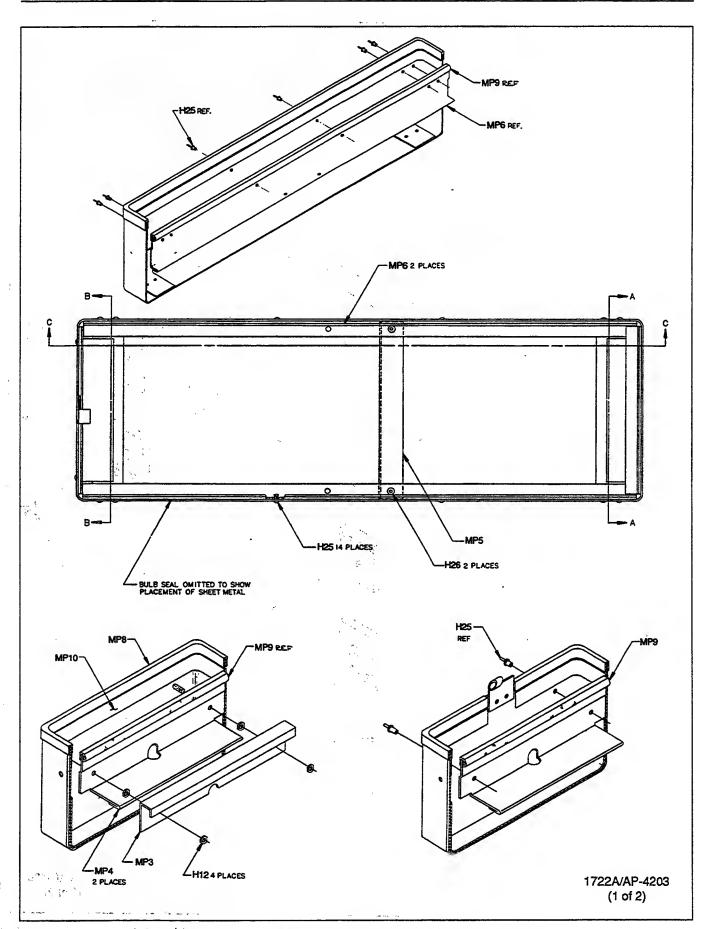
A15 Instrument Covers (Front & Back) Assembly
